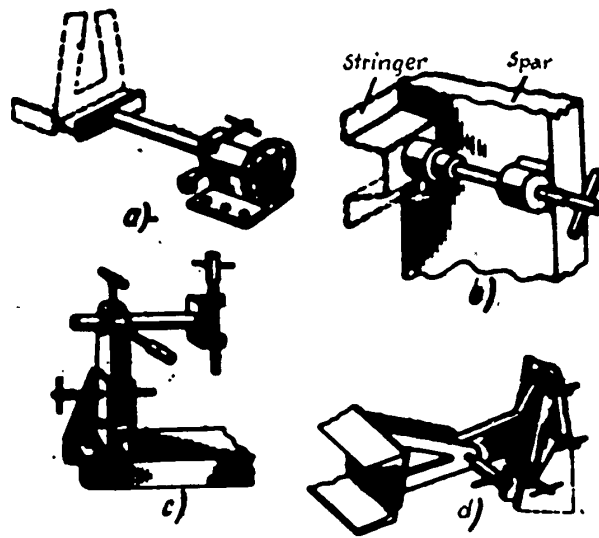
Some of the Holding Devices for Mounting to Assembly Fixtures
